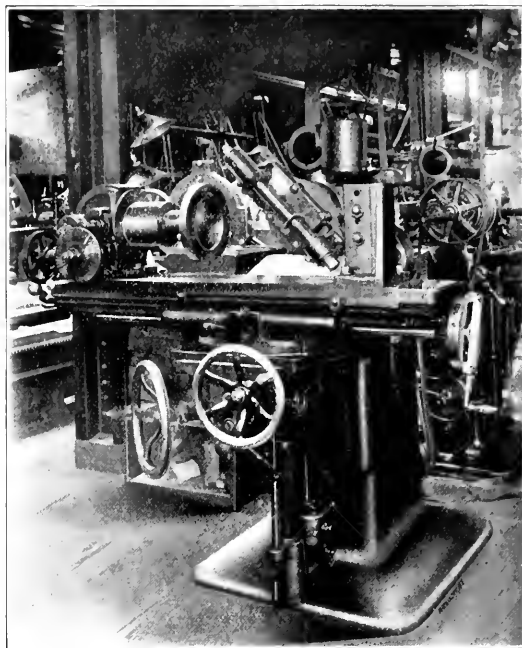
Spiral Cutting Attachment for Milling Machine.
